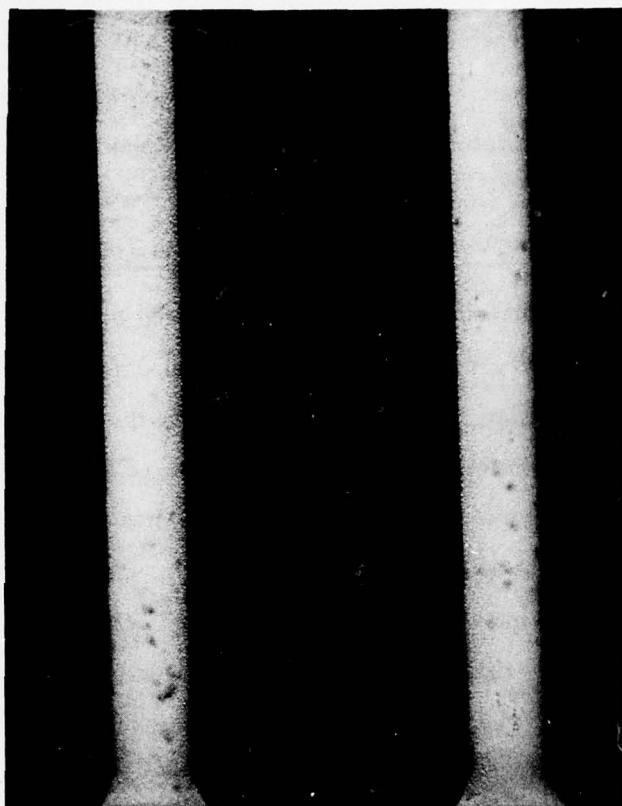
Gauge Sections of Tensile Test Specimens Prior to Testing with Dye Penetrant Developer in Place
